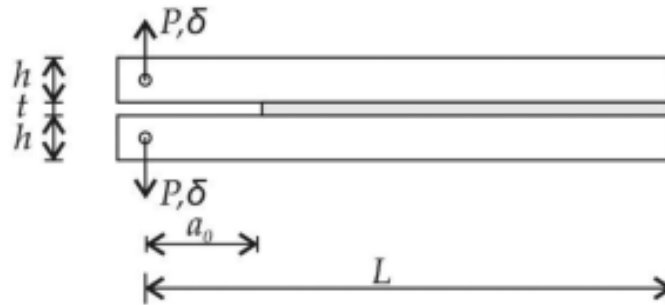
DCB specimen's geometry [14]. Dimensions in millimetres.
